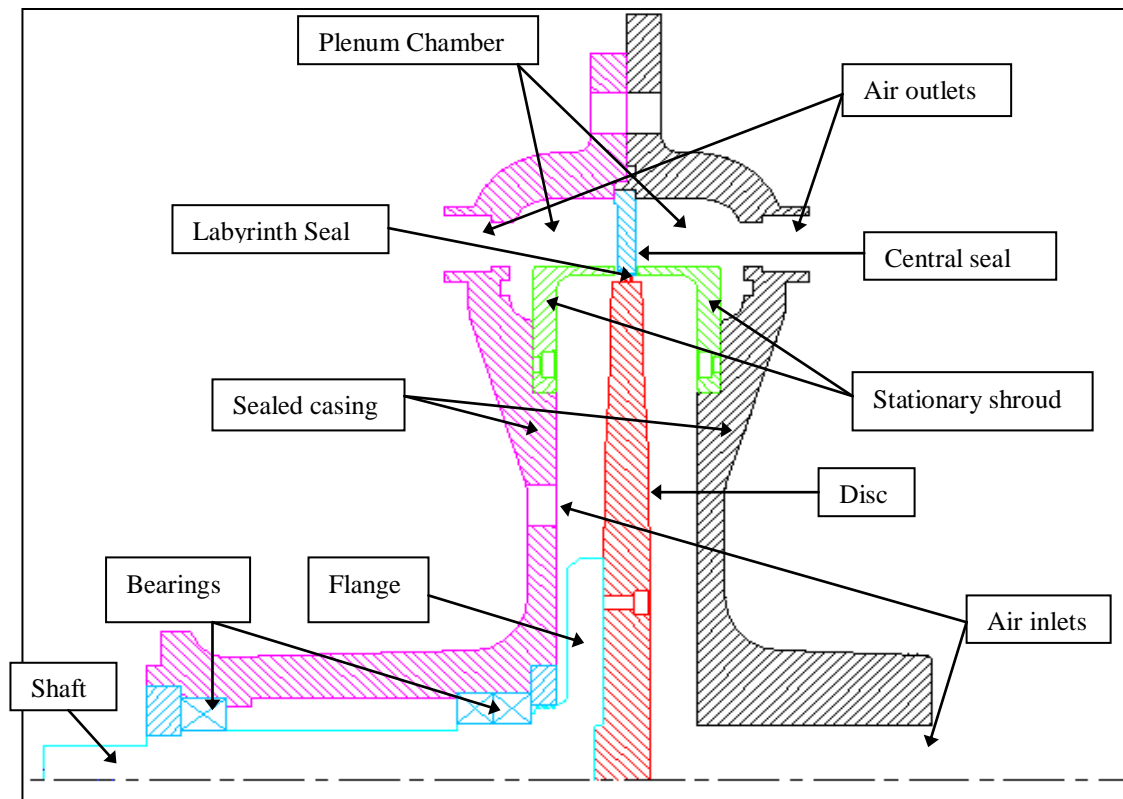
Diagram showing half section of inside the pressurised casing
